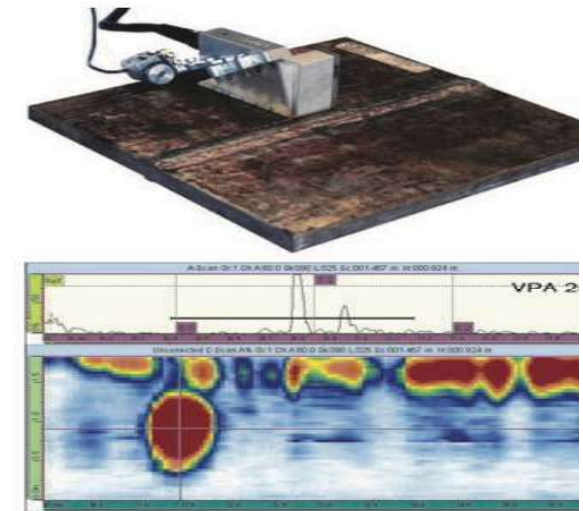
One-line scan for weld inspection using an encoded 2.4 MHz element probe steered at 60 degrees
